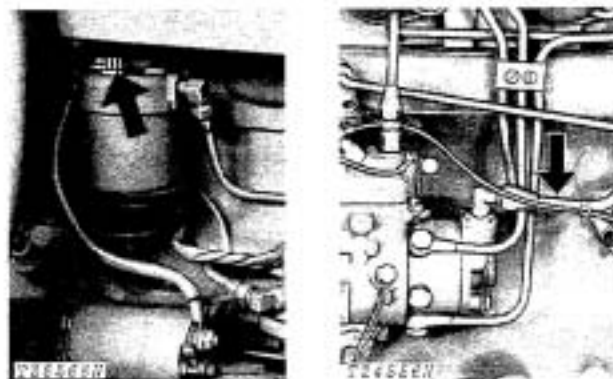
Bleed Plug (Left) and Inlet Line (Right)
